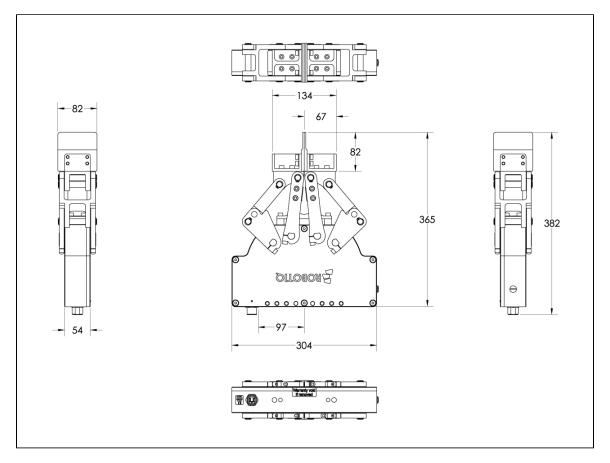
Robotiq 2-Finger Adaptive Robot Gripper – 200 technical dimensions in closed position.
